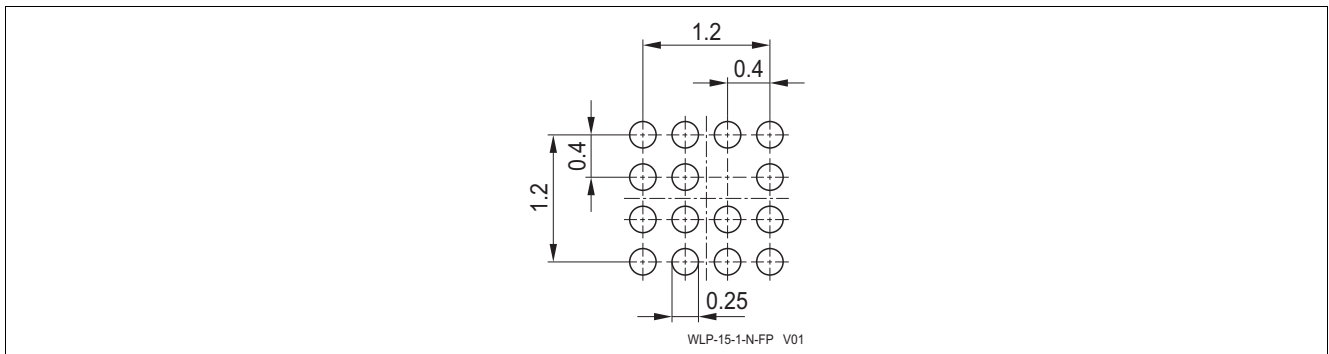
Package footprint for WLP-15-1 (dimension in mm)
